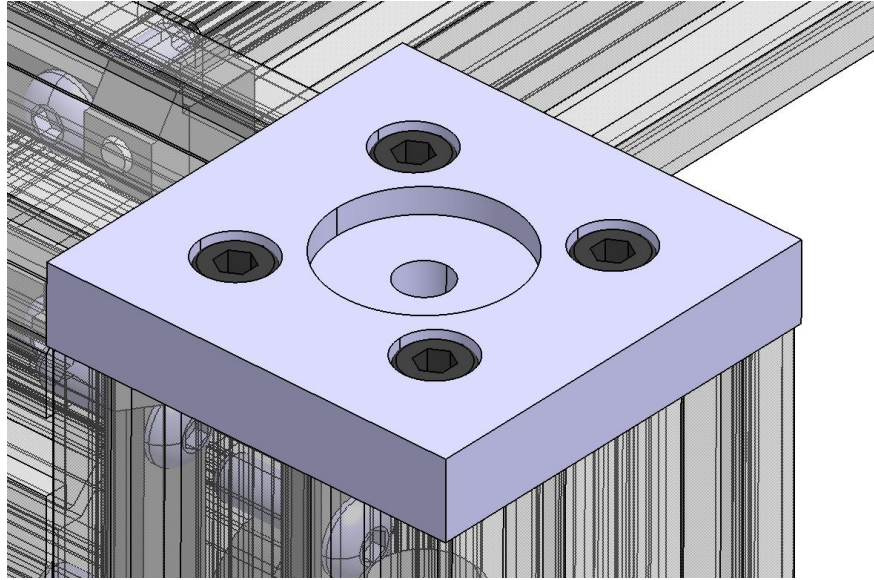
Example of a female-type datum machined on a metal plate
